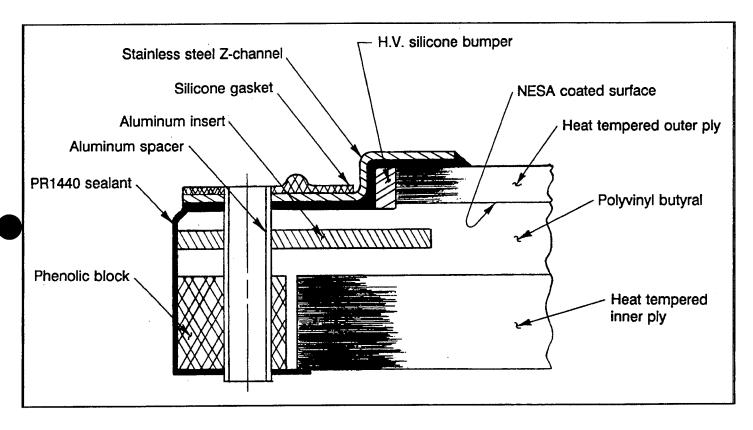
C/KC-135 #1 W/WS Cross-Section
